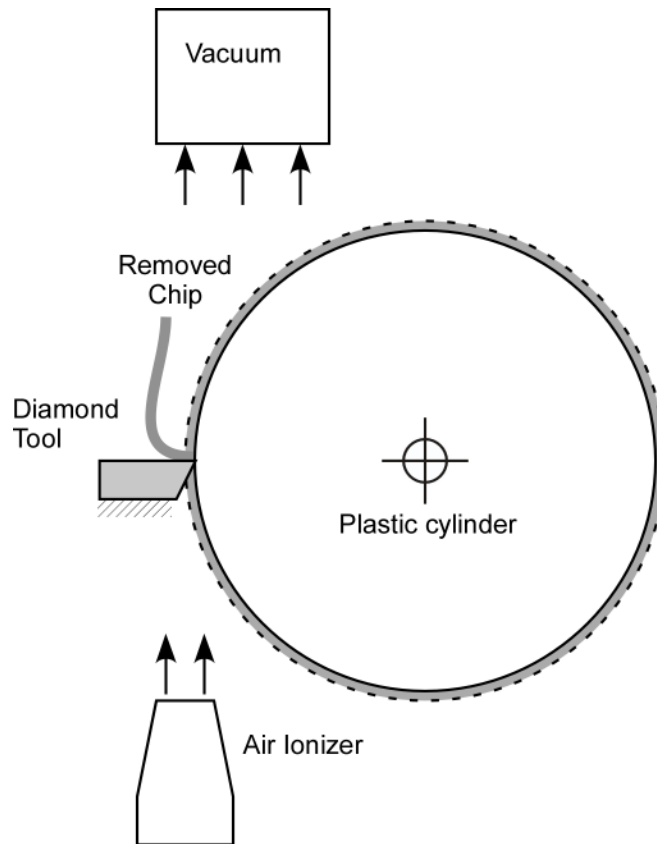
Schematic of plunge cutting setup for tool wear experiments.
